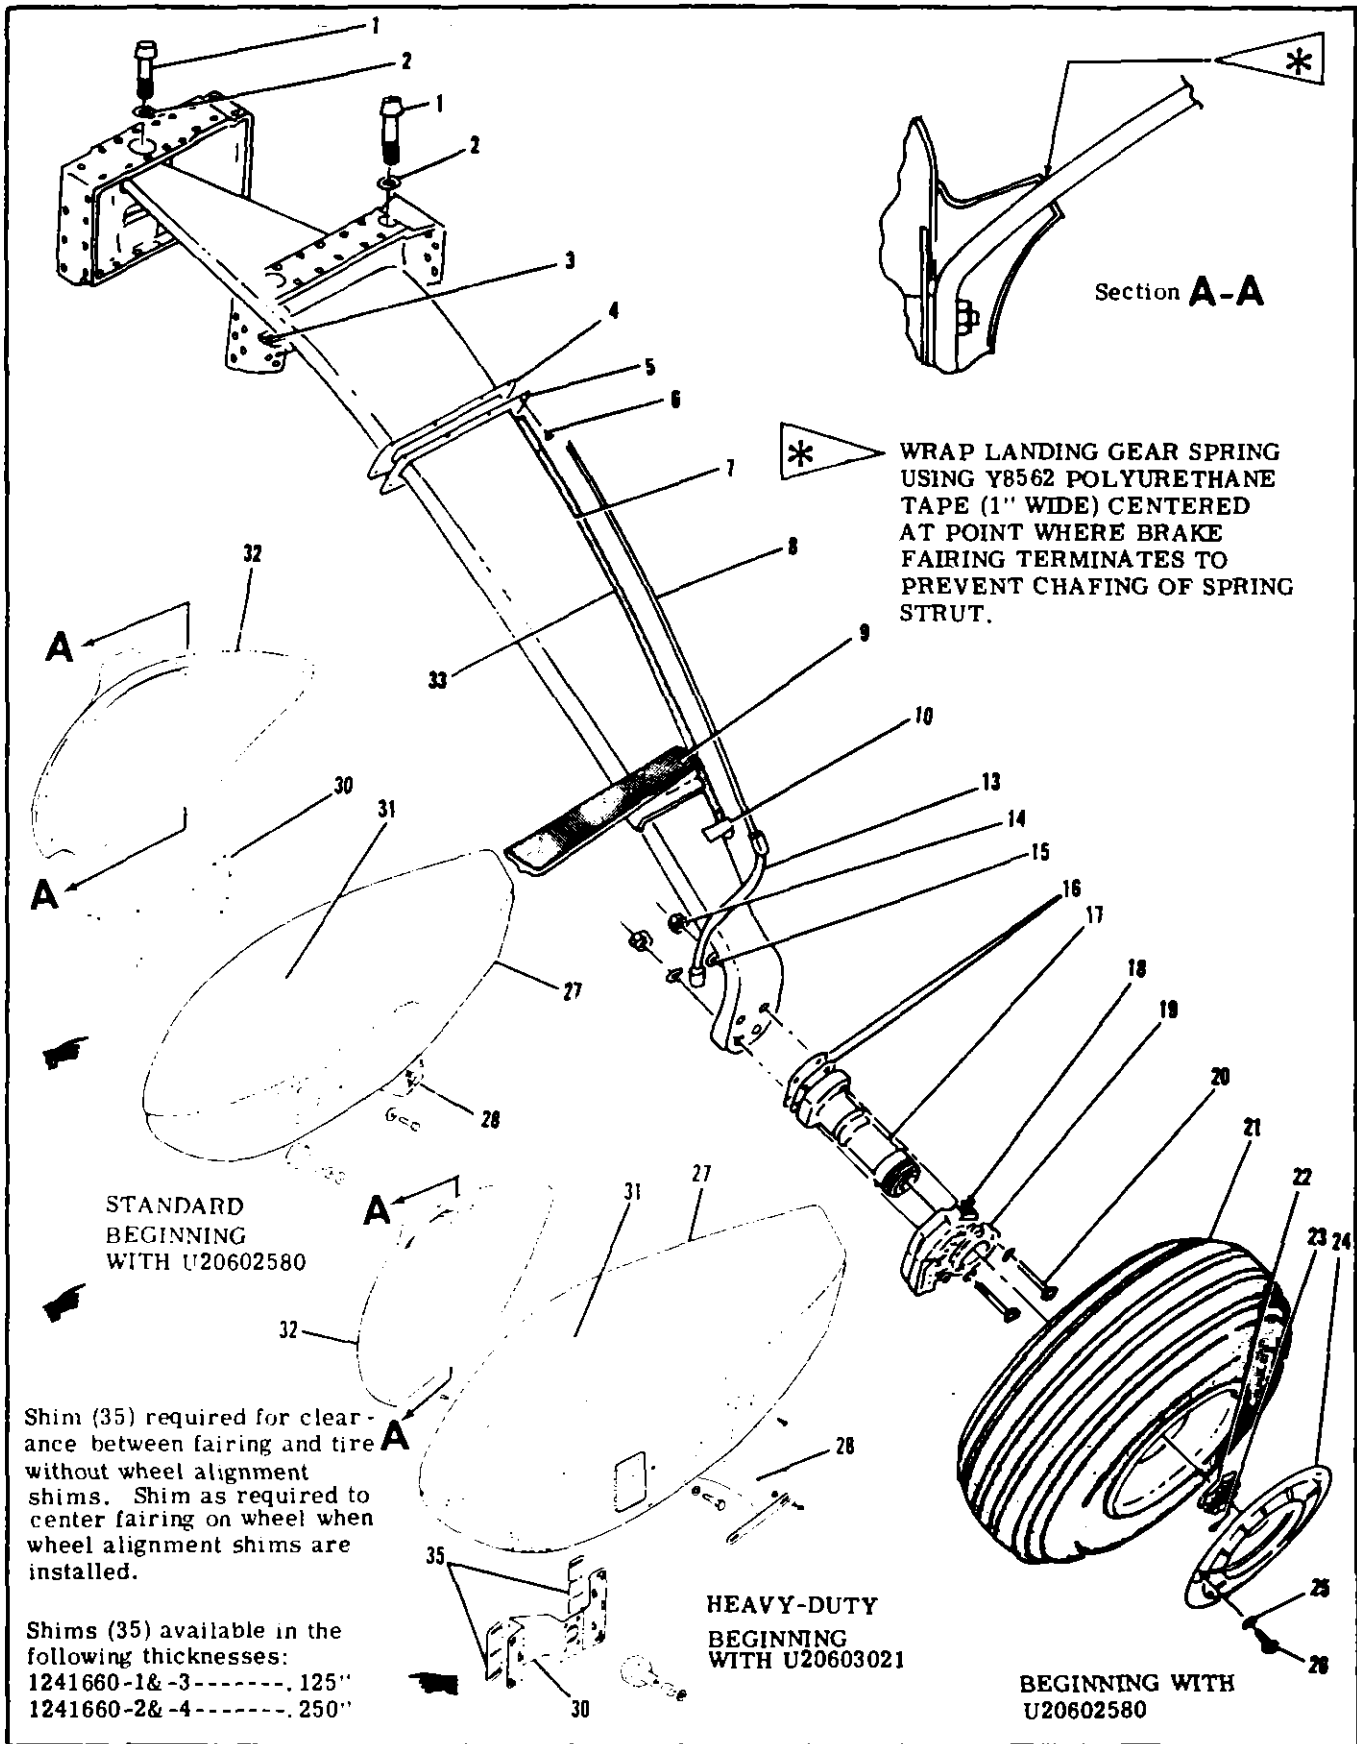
Main Landing Gear (Sheet 2 of 2)
